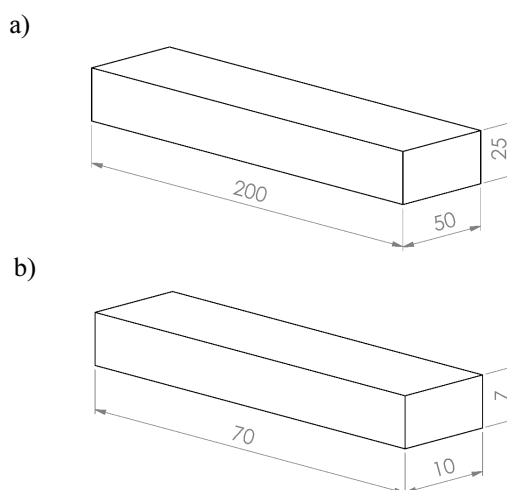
Sample dimensions: a) for three-point bending tests, b) for Charpy impact tests
